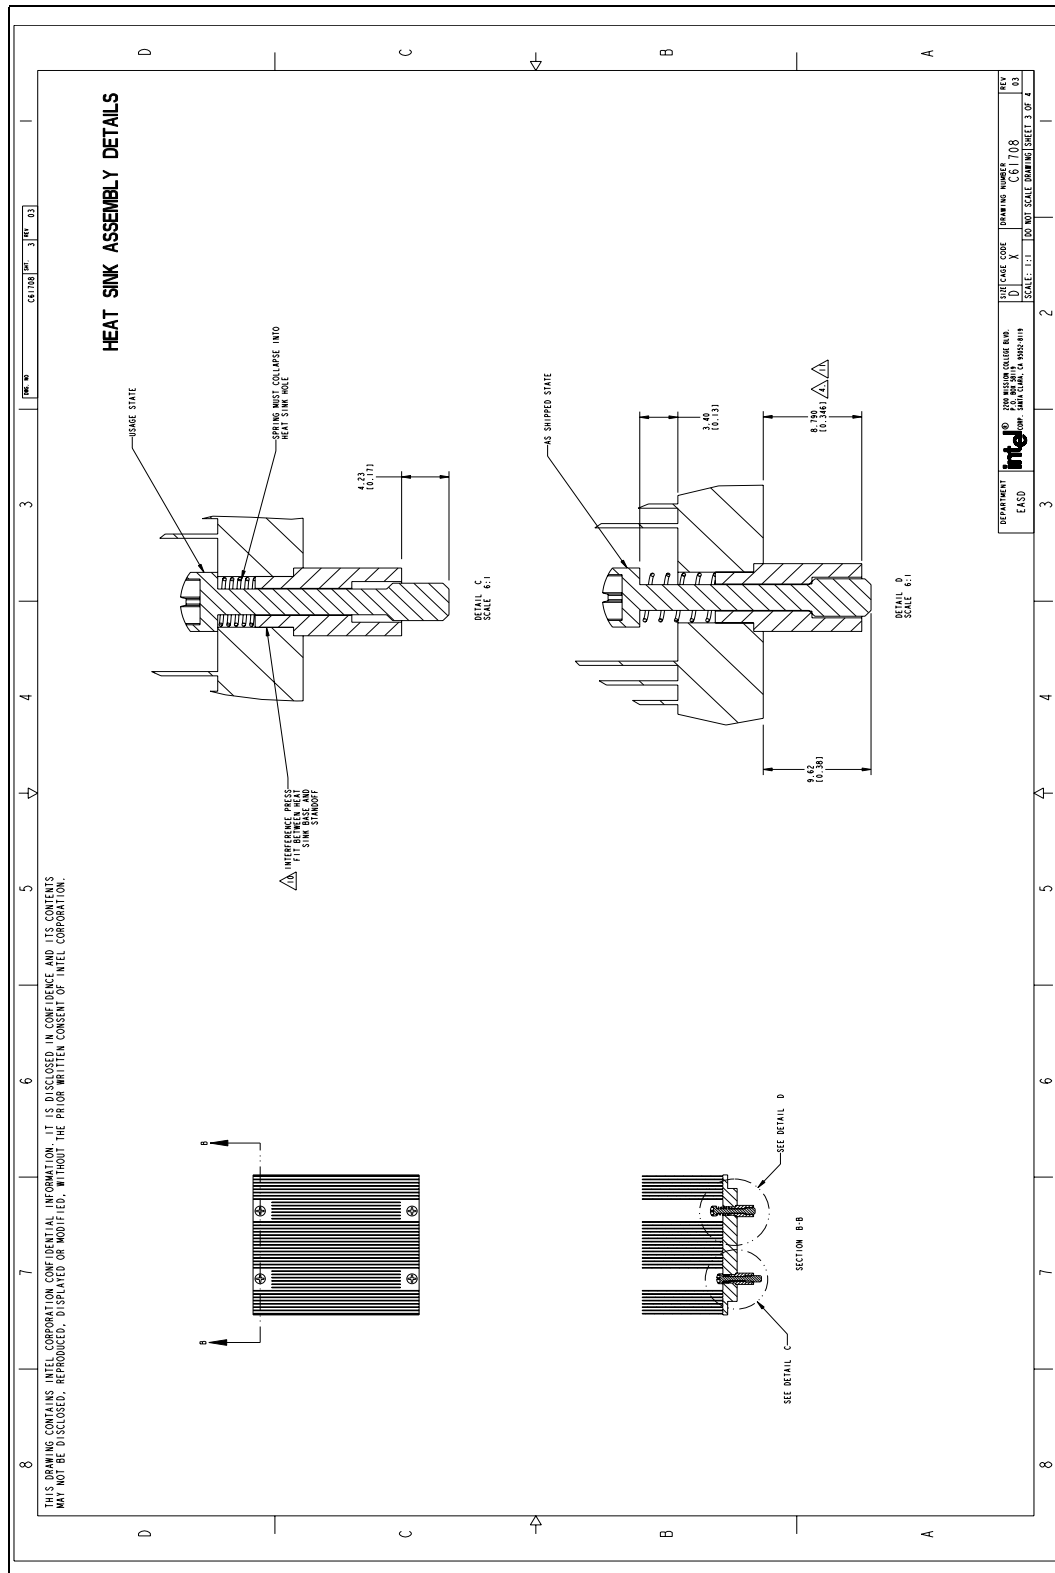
2U CEK Heatsink (Sheet 4 of 4)
